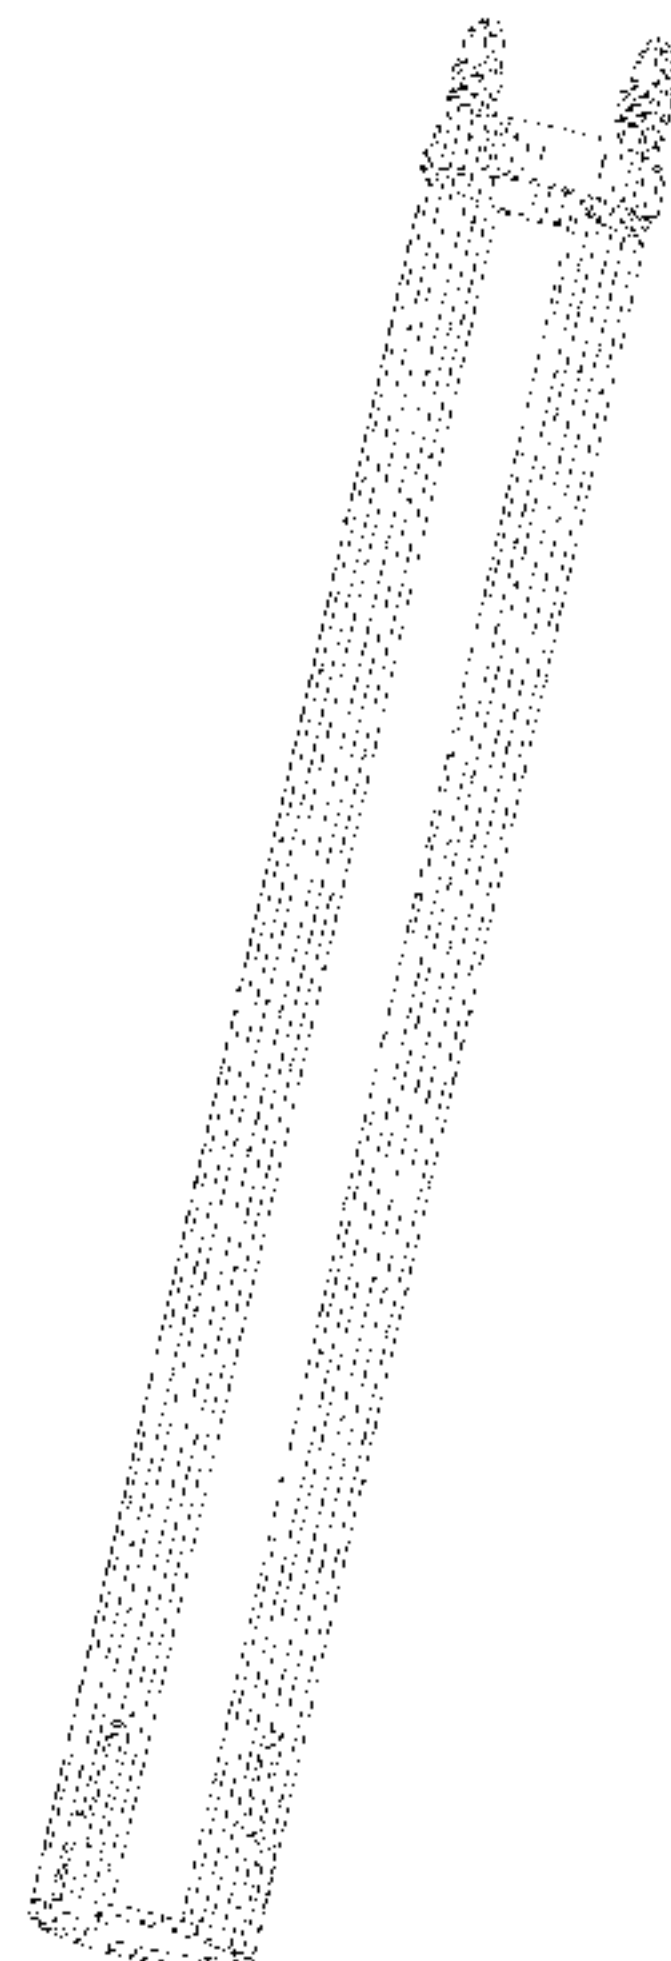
is a side view of a third side of the surgical tool of FIG. 17;
